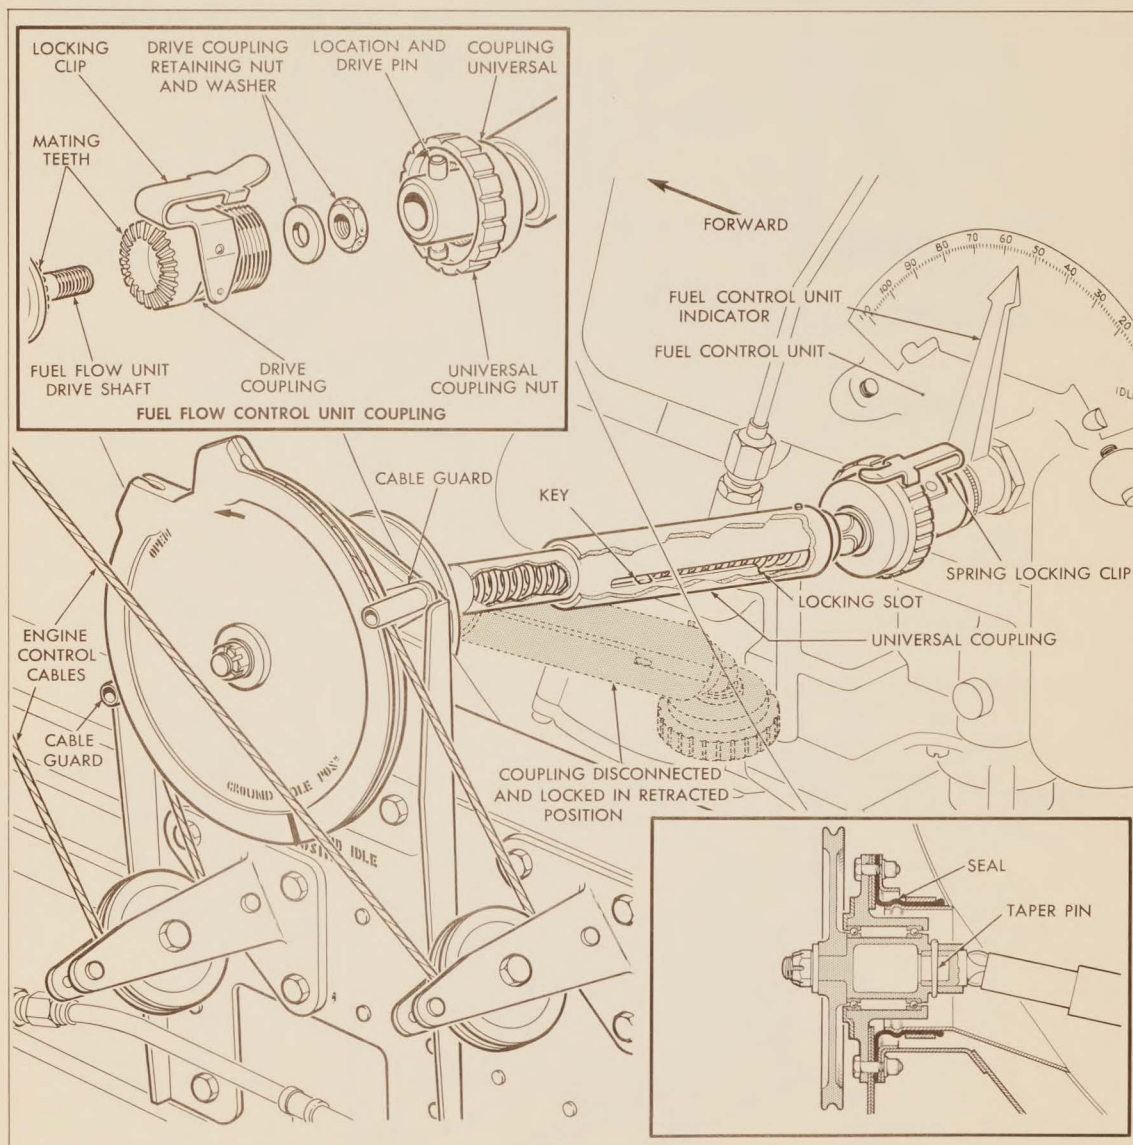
ENGINE CONTROL DETAILS - R.H. ENGINE
